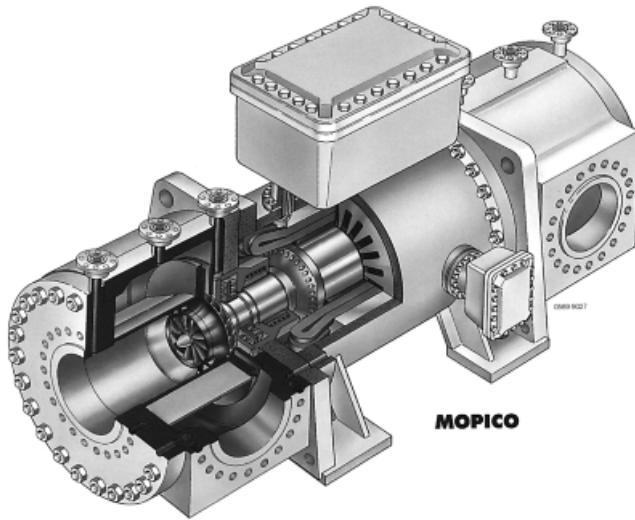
Sulzer Mopico motor pipeline compressor, incorporating magnetic bearings. (Sulzer, Ltd., Winterthur, Switzerland)
